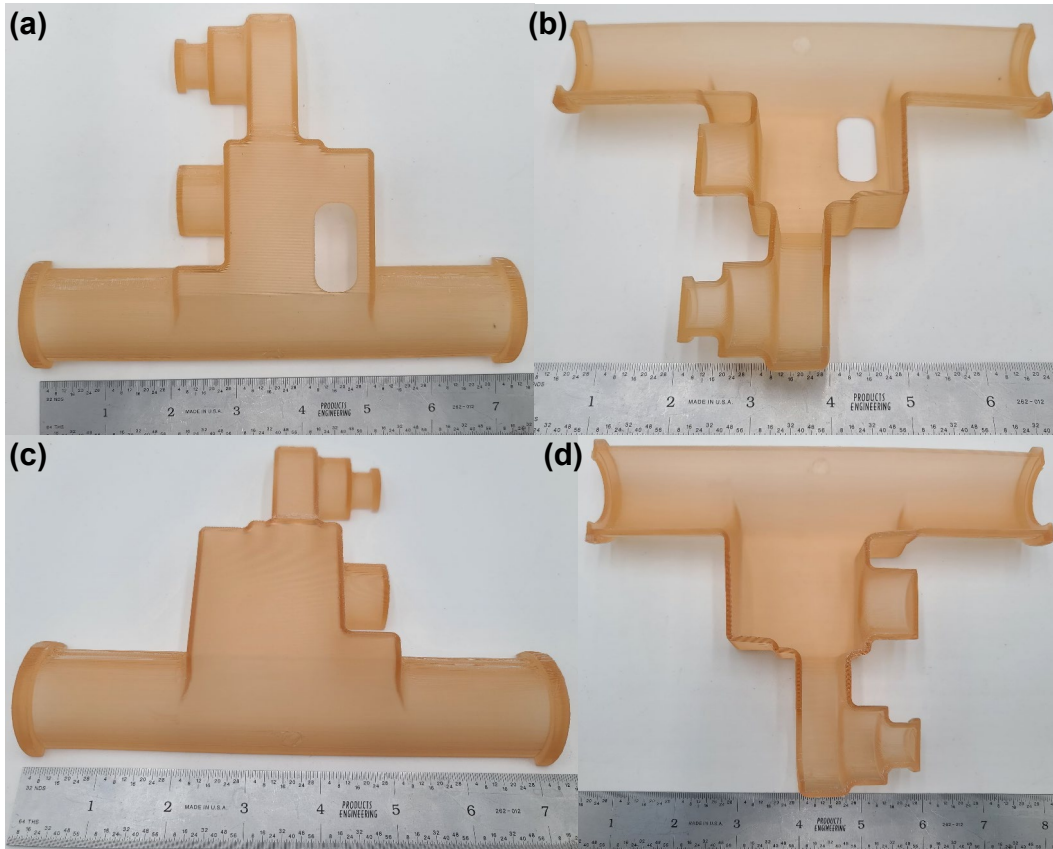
Bus bar cover assembly subparts: (a) Part 1 top view, (b) Part 1 inside view, (c) Part 2 top view, and (d) Part 2 inside view.
